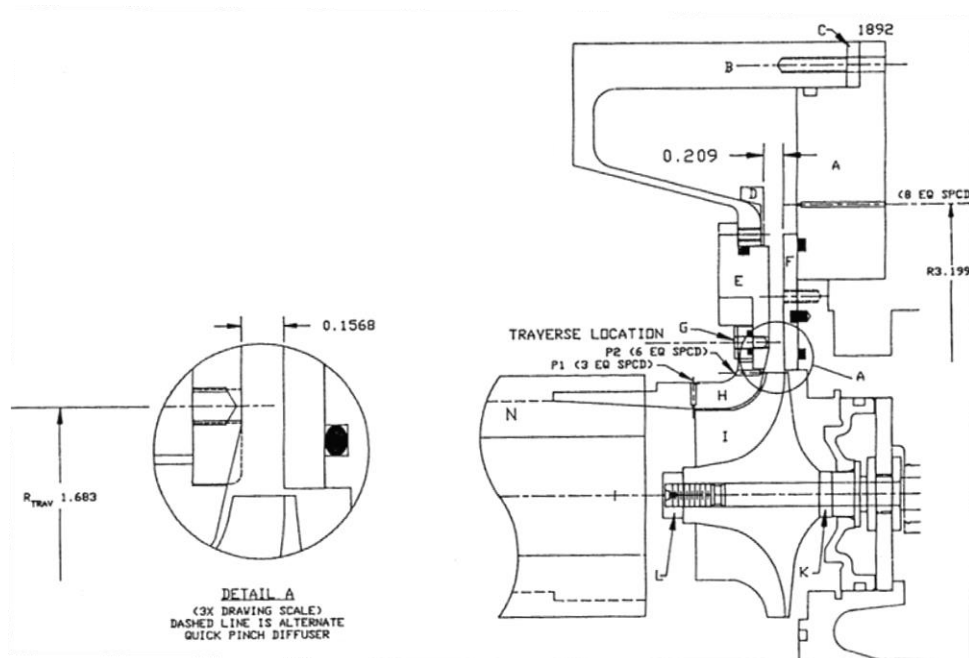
The 60 mm test rig with a front pinch vaneless diffuser, the 16 bladed turbocharger $N_s = 110$ pr = 3.5 impeller, and the inlet duct. A long inlet duct is necessary to gain access for traversing.
